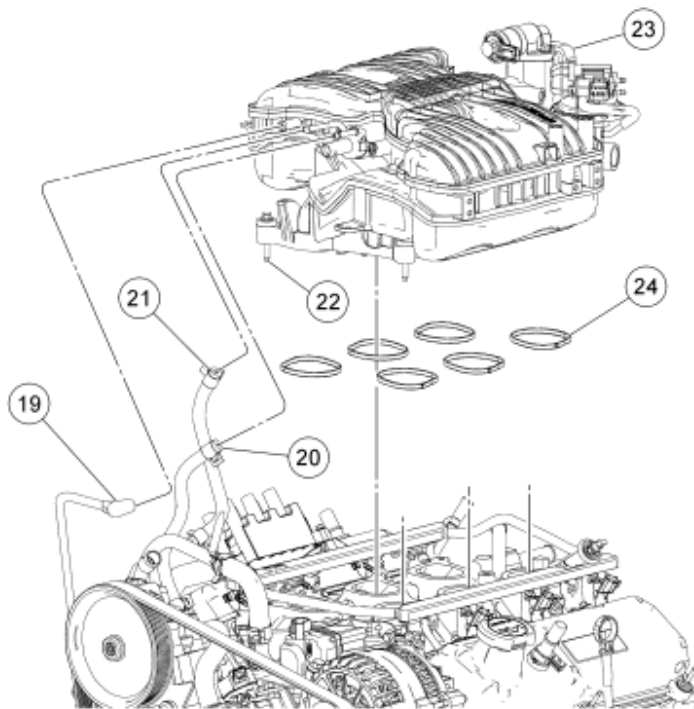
Exploded View Of Upper Intake Manifold Components & Connectors
